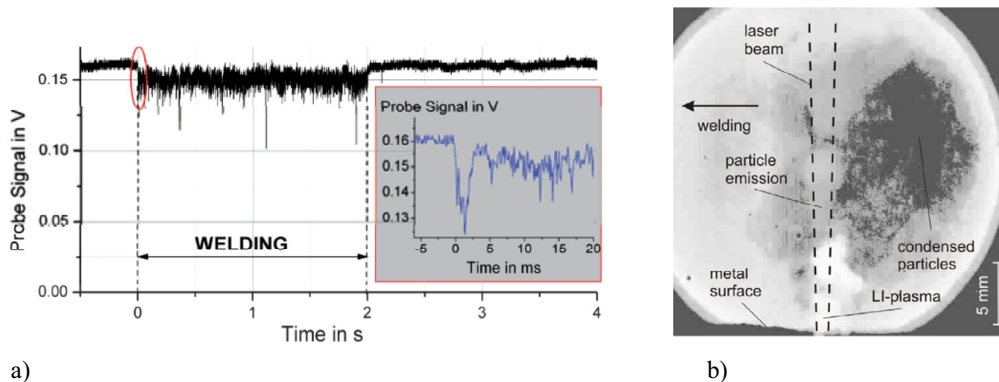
(a) Typical form of the probe beam transmission signal during welding; (b) video observation of the condensed particle cloud during the welding process.
